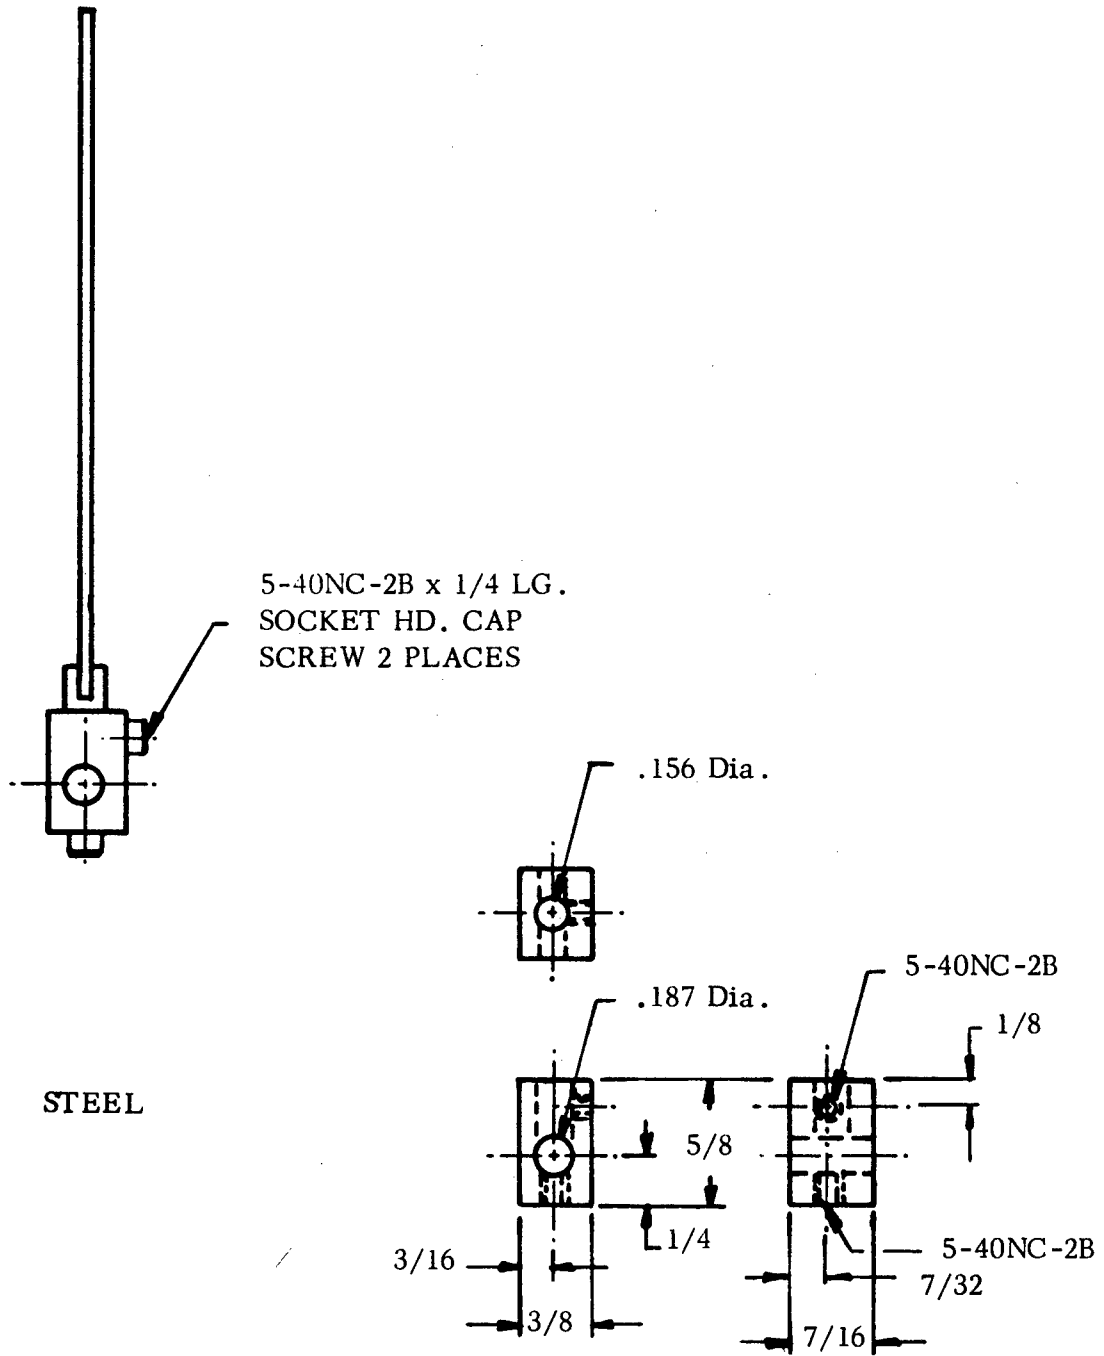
C. BITE BAR BRACKET WITH BLADE HOLDER ATTACHED AND PLAN AND ELEVATION VIEWS OF BITE BAR BLADE HOLDER
